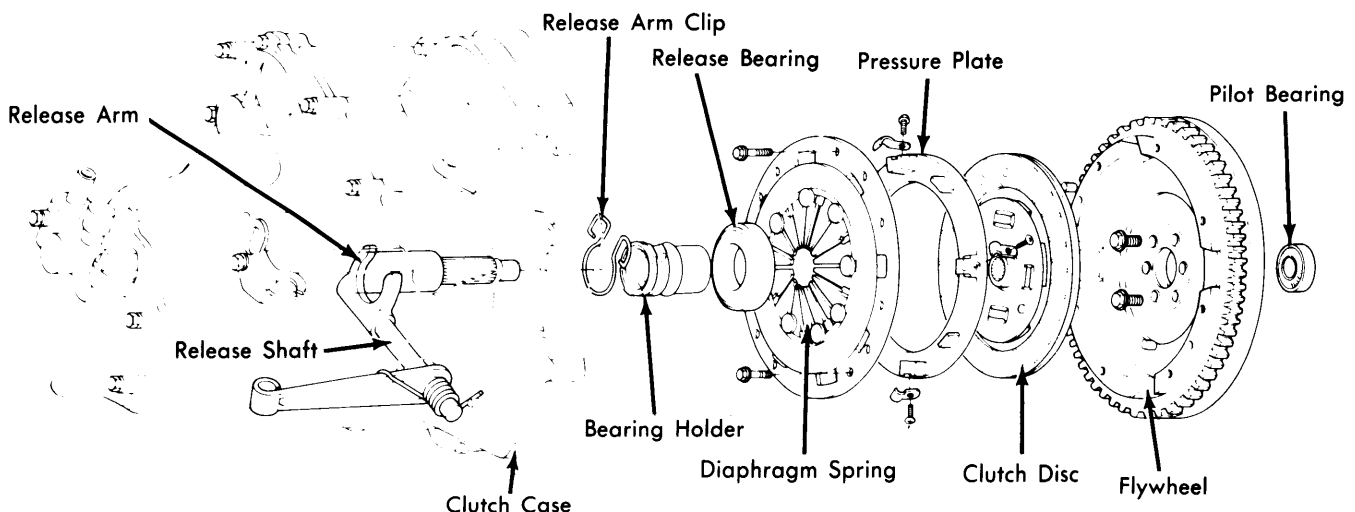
Exploded View of Clutch Assembly with Bell Housing
